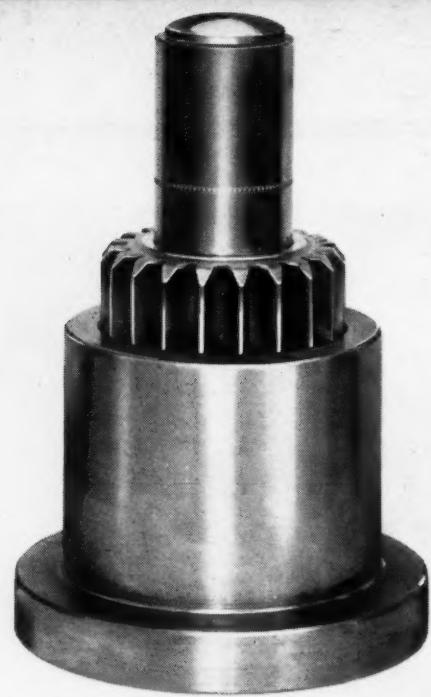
Ball-broaching tool in operating position. Gear is nested in holder through which the broach is forced by press ram
